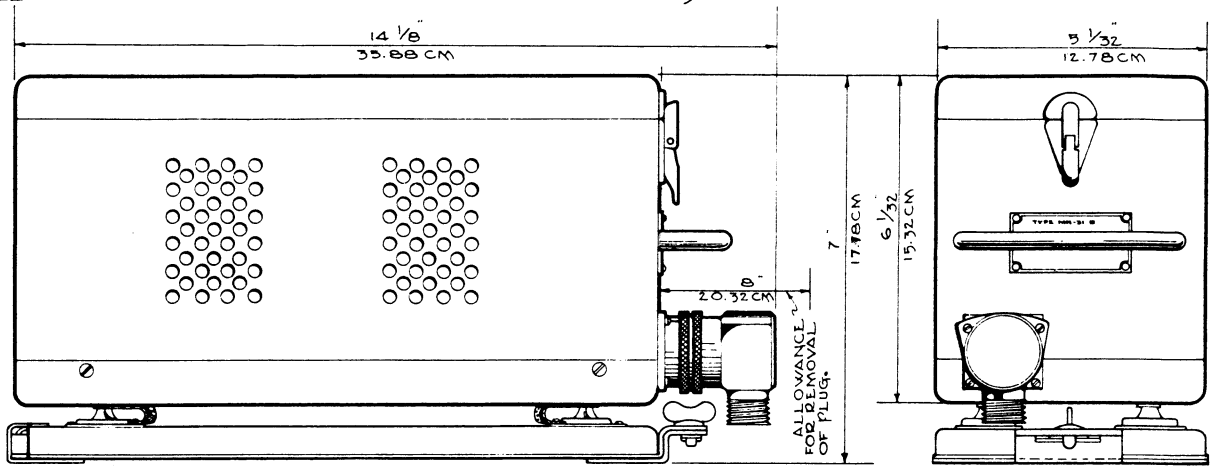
TYPE MN-28 REMOTE CONTROL, OUTLINE & MTG. DIMENSIONS
